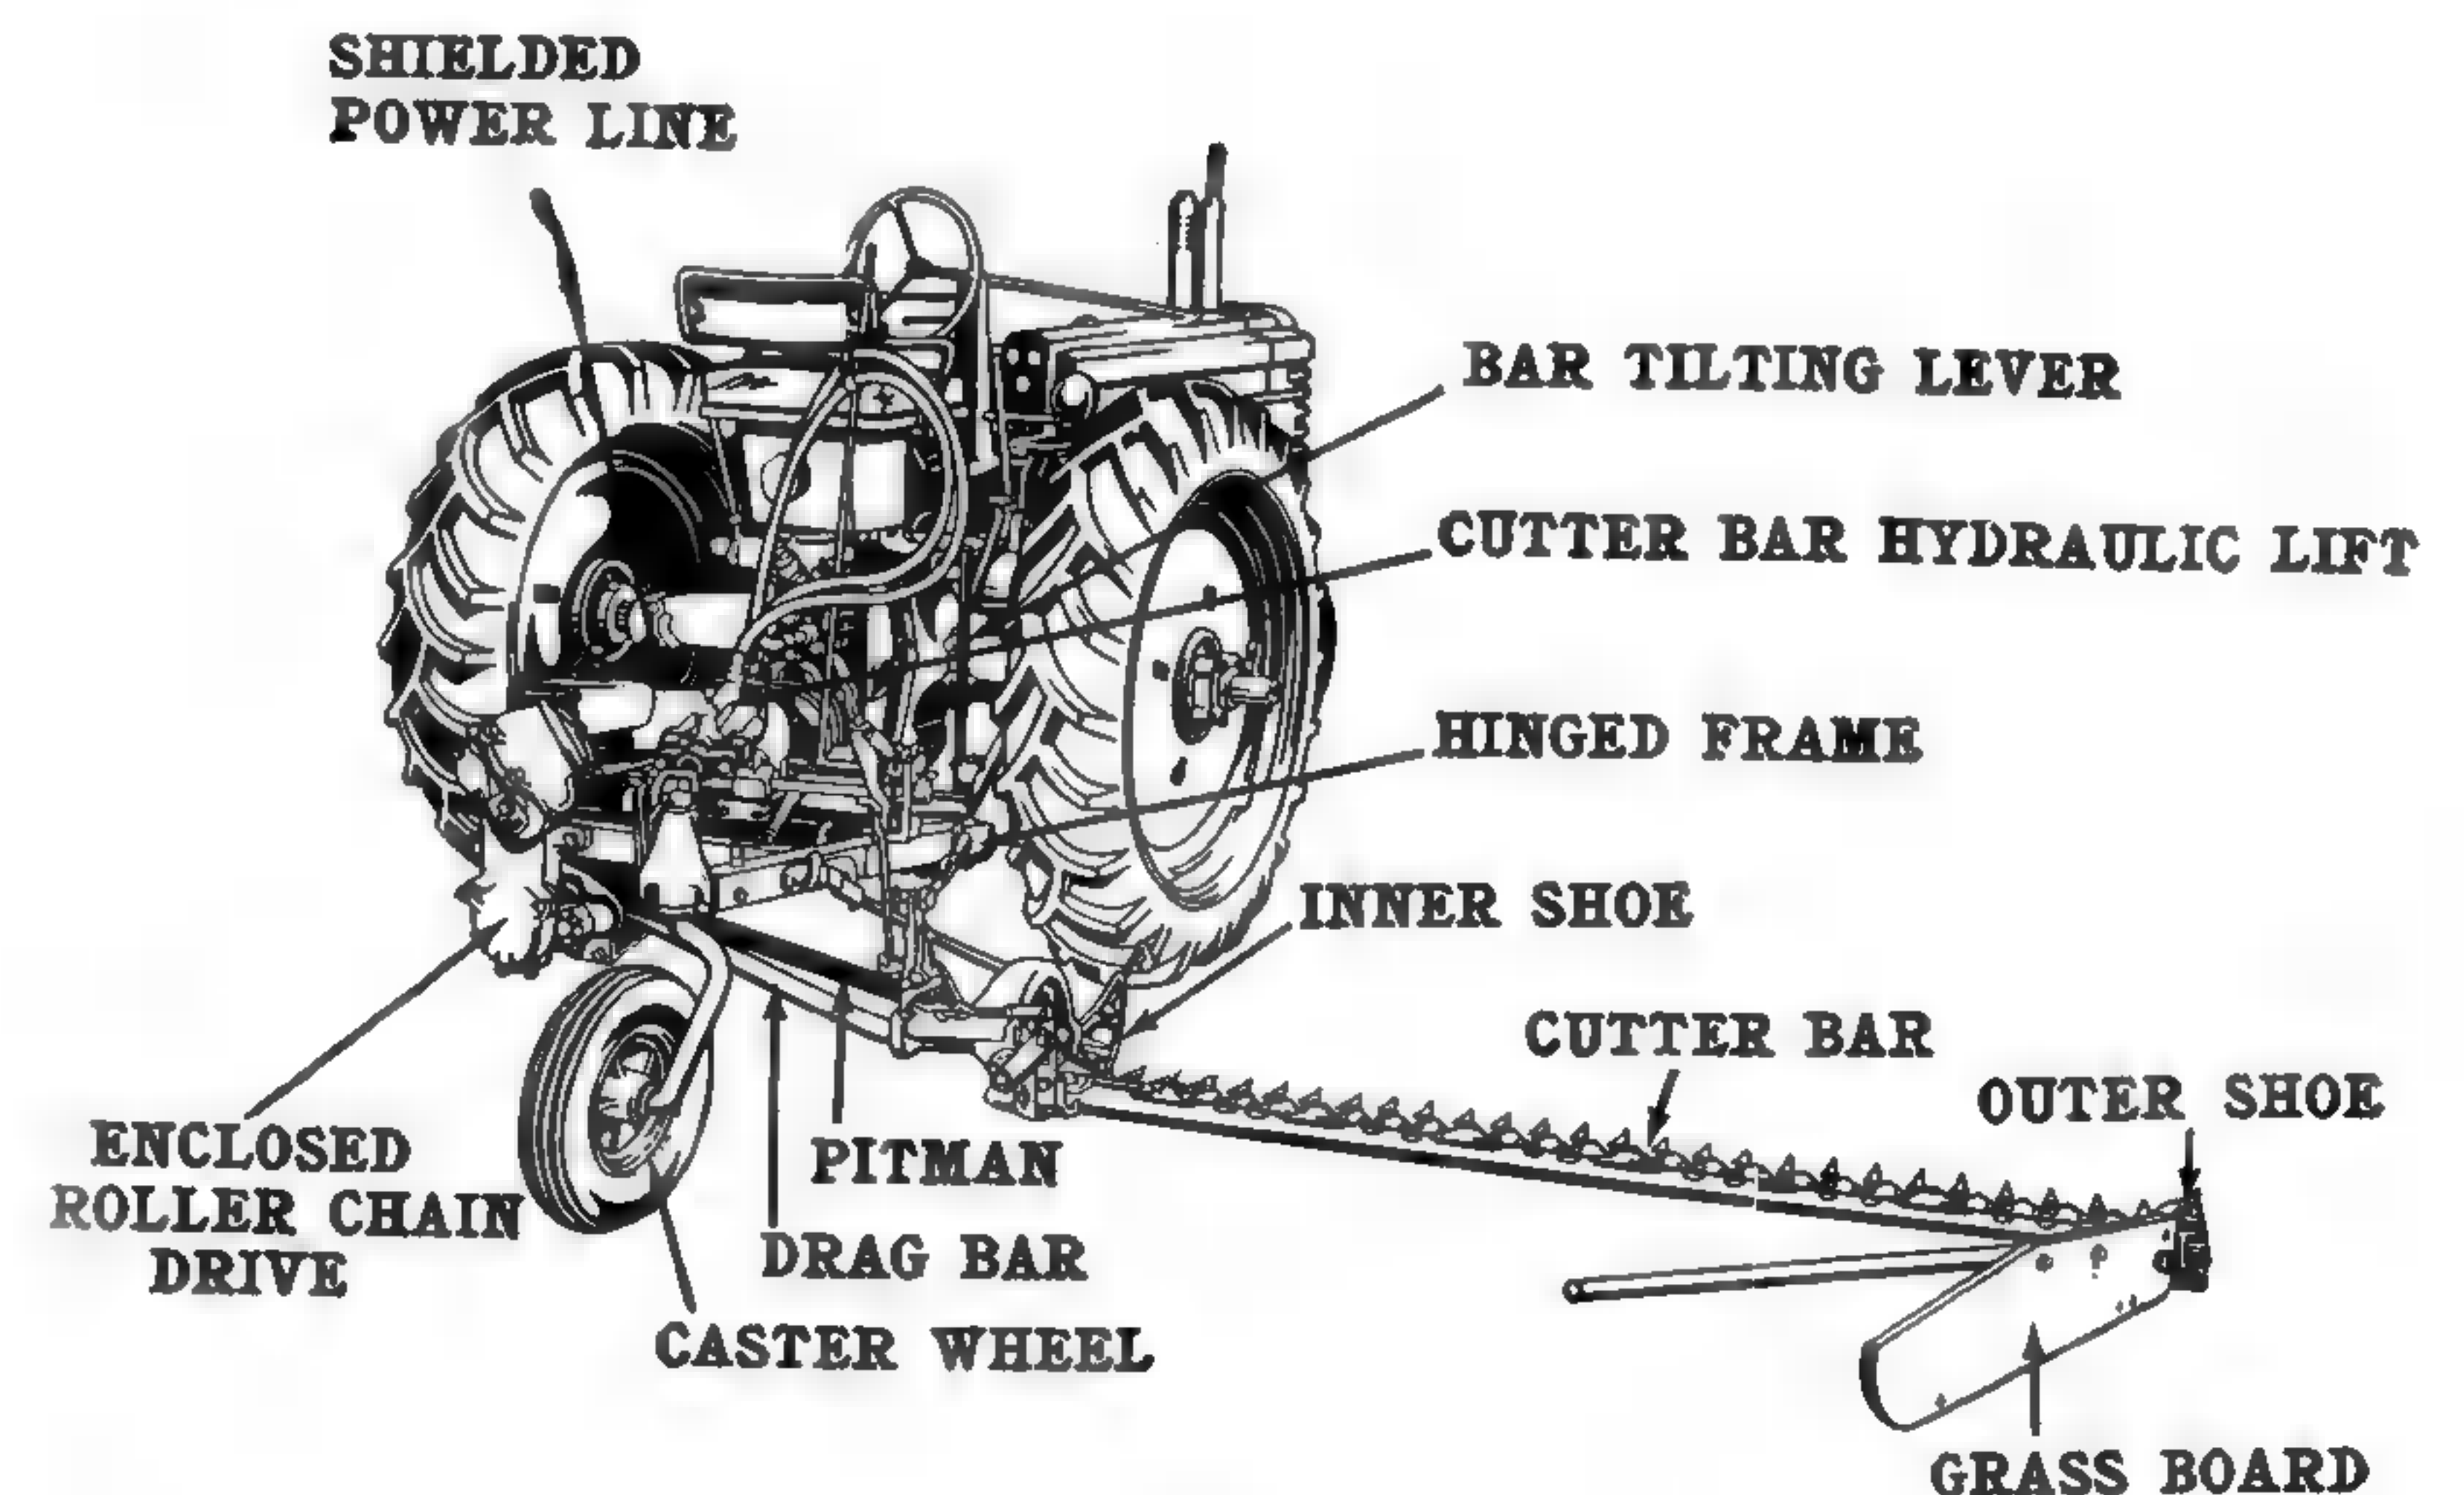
Semi-mounted tractor mower, attached to a general-purpose type tractor. This mower is controlled hydraulically by the remote cylinder.
